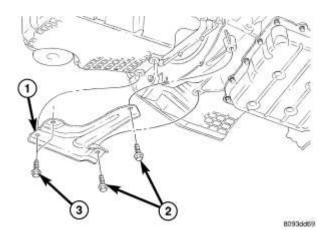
View Of Structural Collar (Note: Cross-Under Pipe Not Shown)
